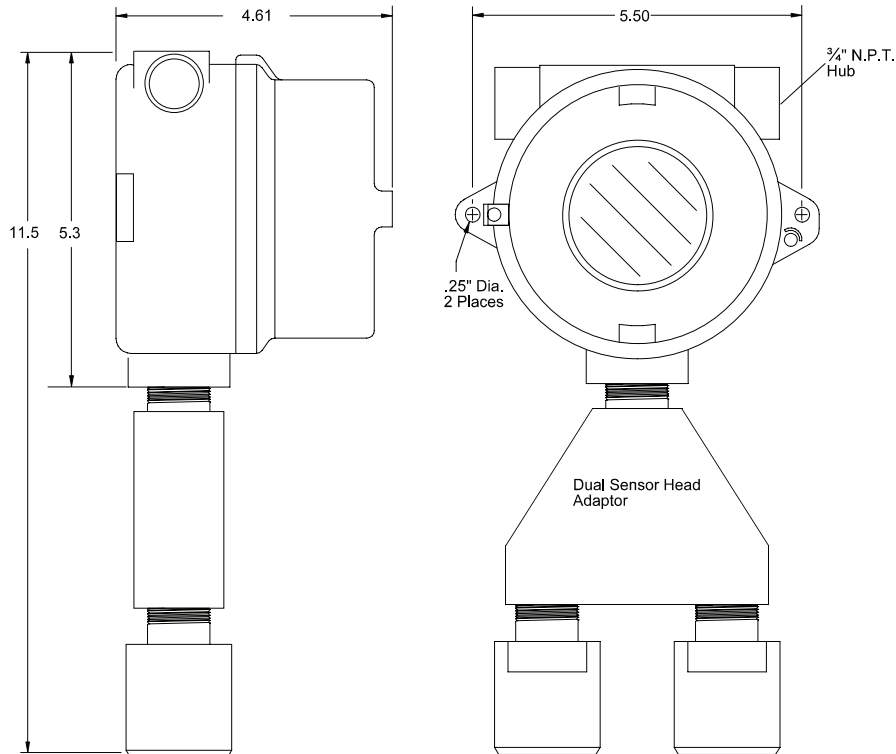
GASMAX Explosion-Proof Housing with Dual Sensor Head Adaptor
